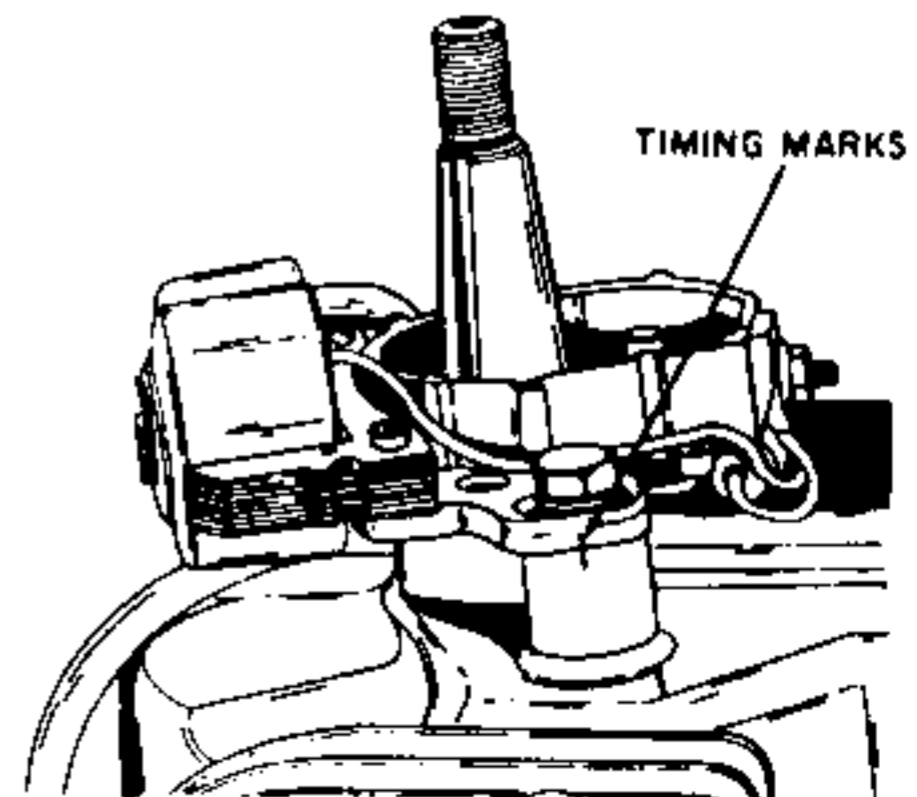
On Models VM70, VH70, HM70, HH70, VM80, HM80, VM100 and HM100 equipped with magneto ignition, adjust breaker point gap to 0.020 inch (0.508 mm) and align timing marks as shown.
